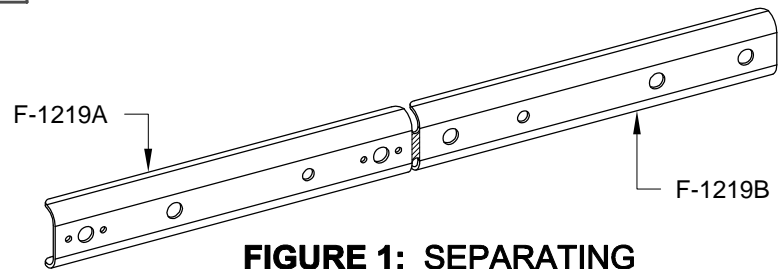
SEPARATING THE F-1219 FLAPERON MIXER ARM
